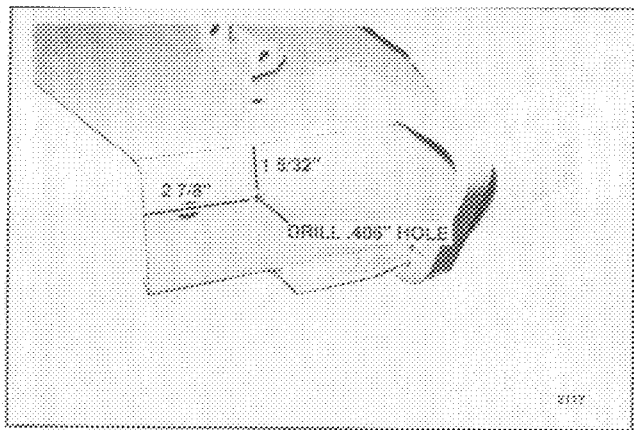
Drill Deflector Hole In Deck - 60" Mower
